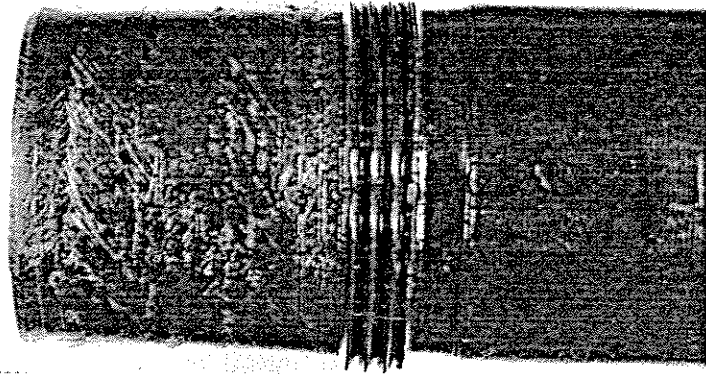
Damaged Pin Section of Threaded Composite Joint [Threaded Composite Joint Leaked at $P_i=3$ ksi and $P_a=21$ kips with $T=2$]
